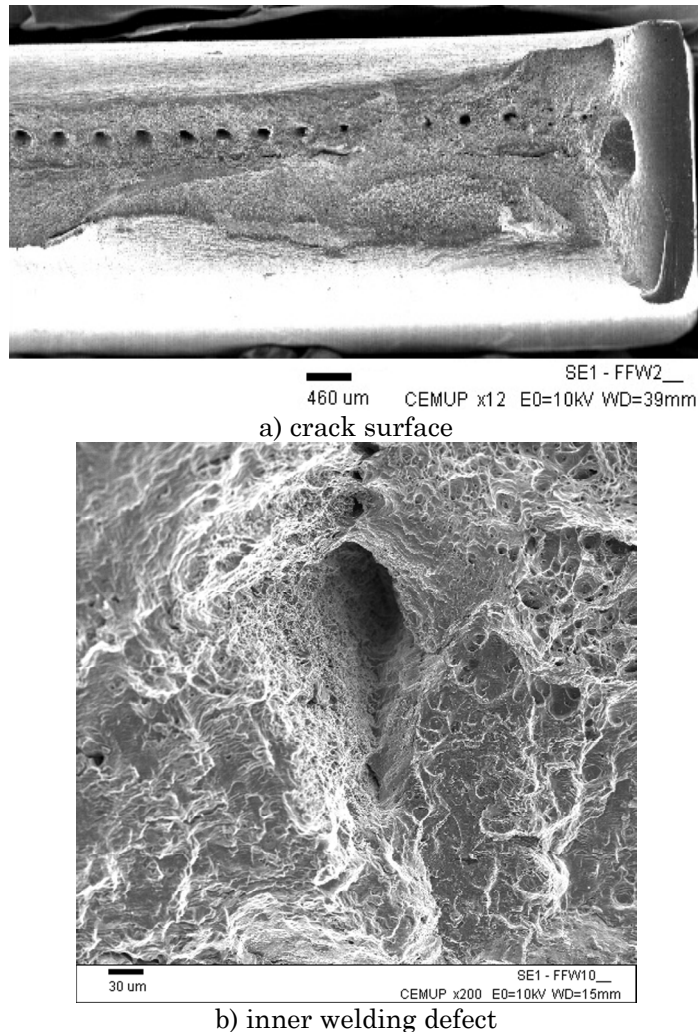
SEM analysis of a crack surface on a FS welded specimen.
